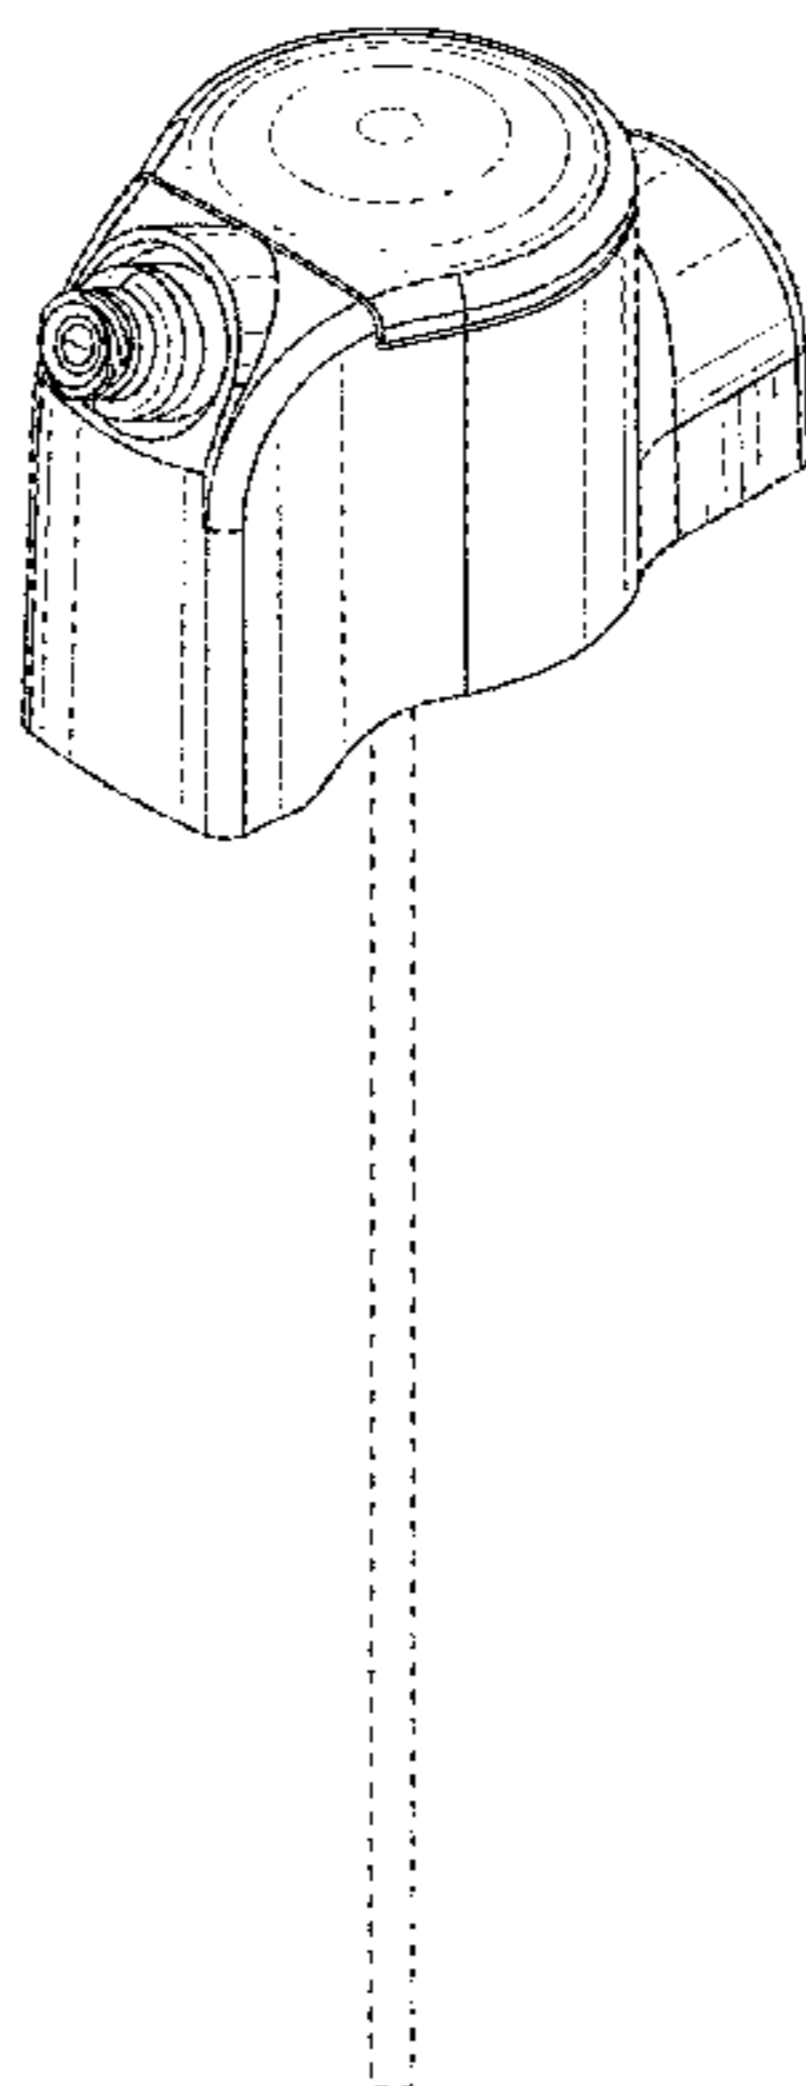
is a bottom rear perspective view of the dispenser head of the modular filling station; and,
